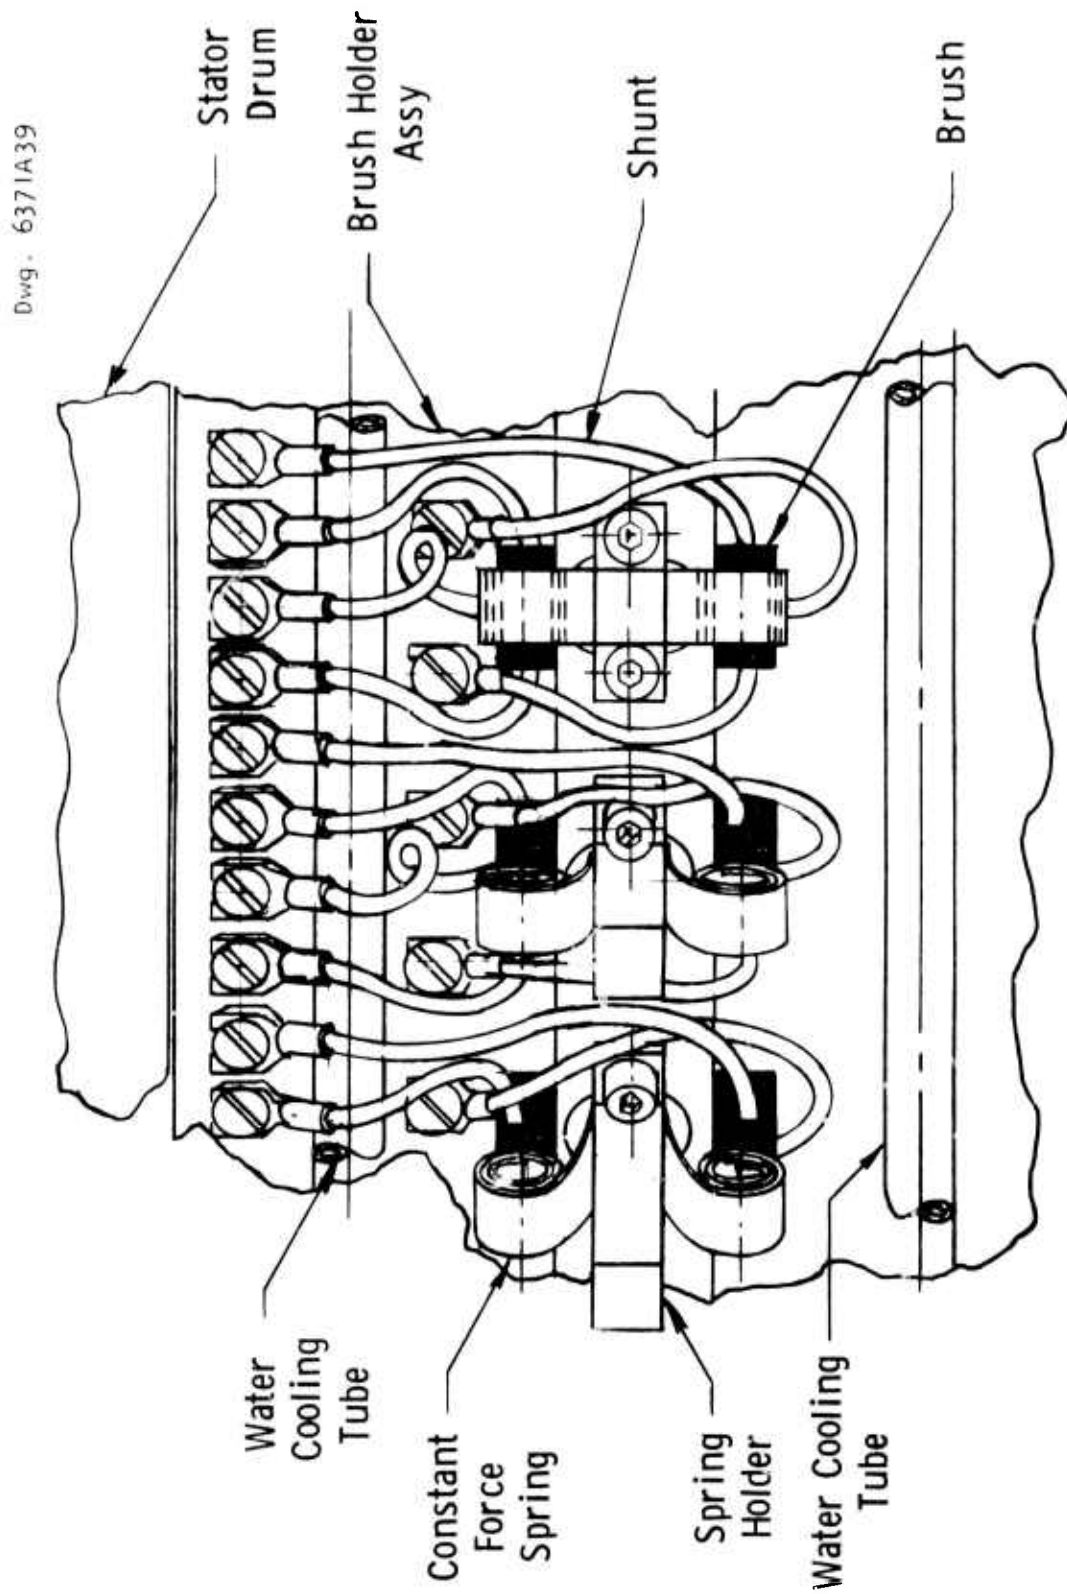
Brushholder Arrangement for the Machine-Environment Brush Tester (MEB)
